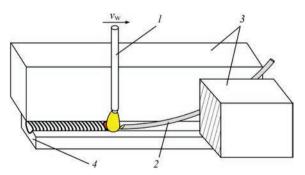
Scheme of the process of multilayer narrow-gap welding with a tungsten electrode: 1 — tungsten electrode; 2 — filler wire; 3 — plates to be welded; 4 — remaining welded-on backing plate
